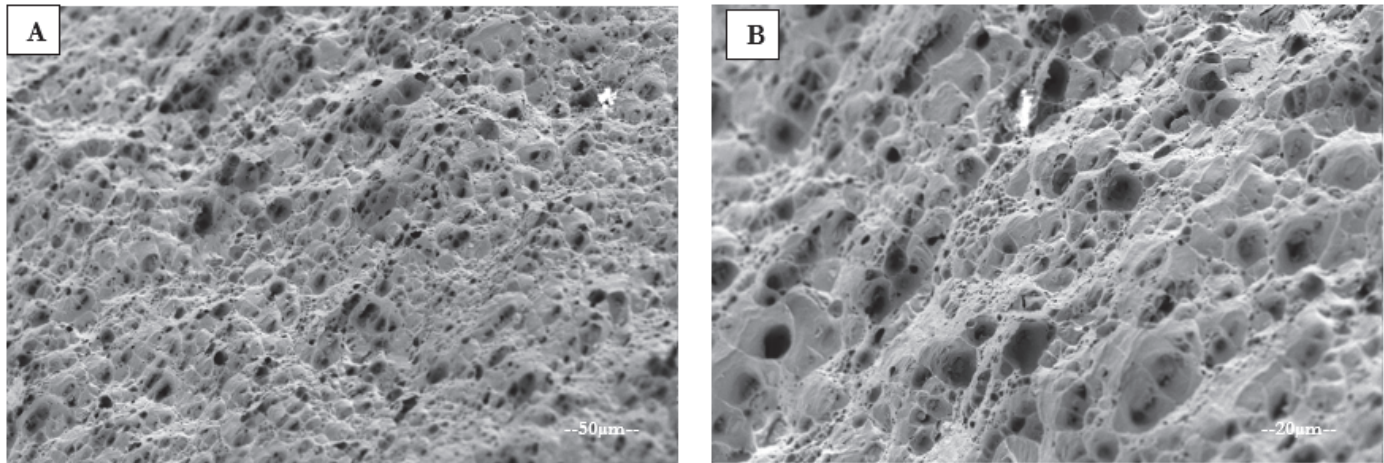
Fracture surface of Sample 1 (600 rpm, 25 mm/min) showing (a) Overall fracture morphology with mixed ductile-brittle features (b) Shallow dimples with indicating limited ductility.
